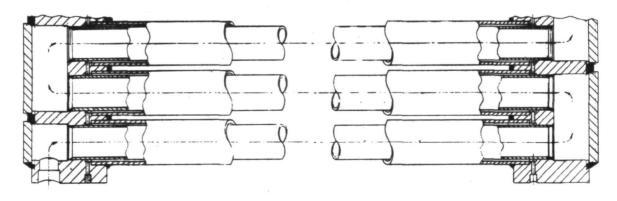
Cross Section of Boiler Tube Bundle Across Narrow Dimension.
